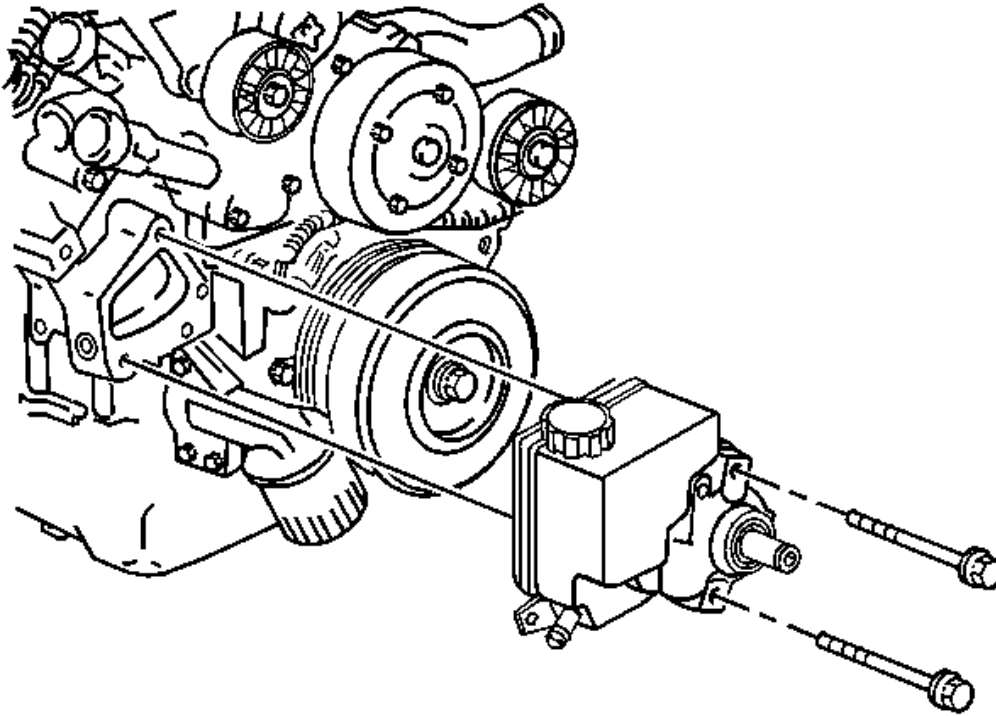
View Of Power Steering Pump And Mounting Bolts
